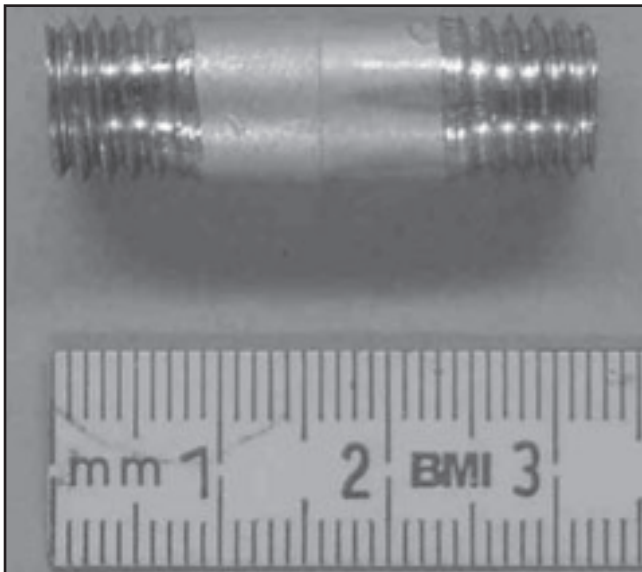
Sb-gaseous brazed Fe tensile test specimen.
